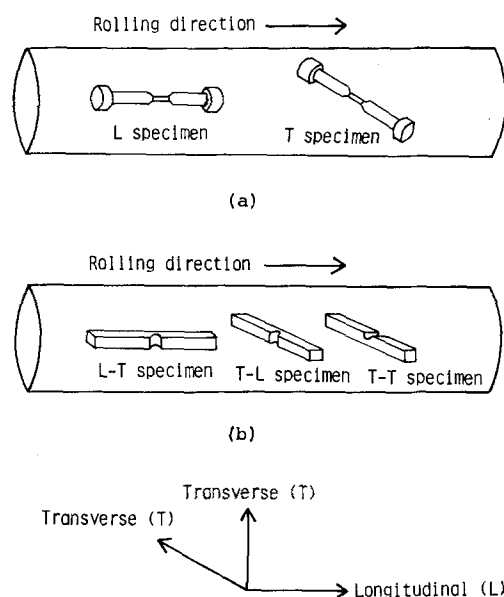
Test orientation of specimen. (a) tensile specimen, (b) Charpy impact specimen.
